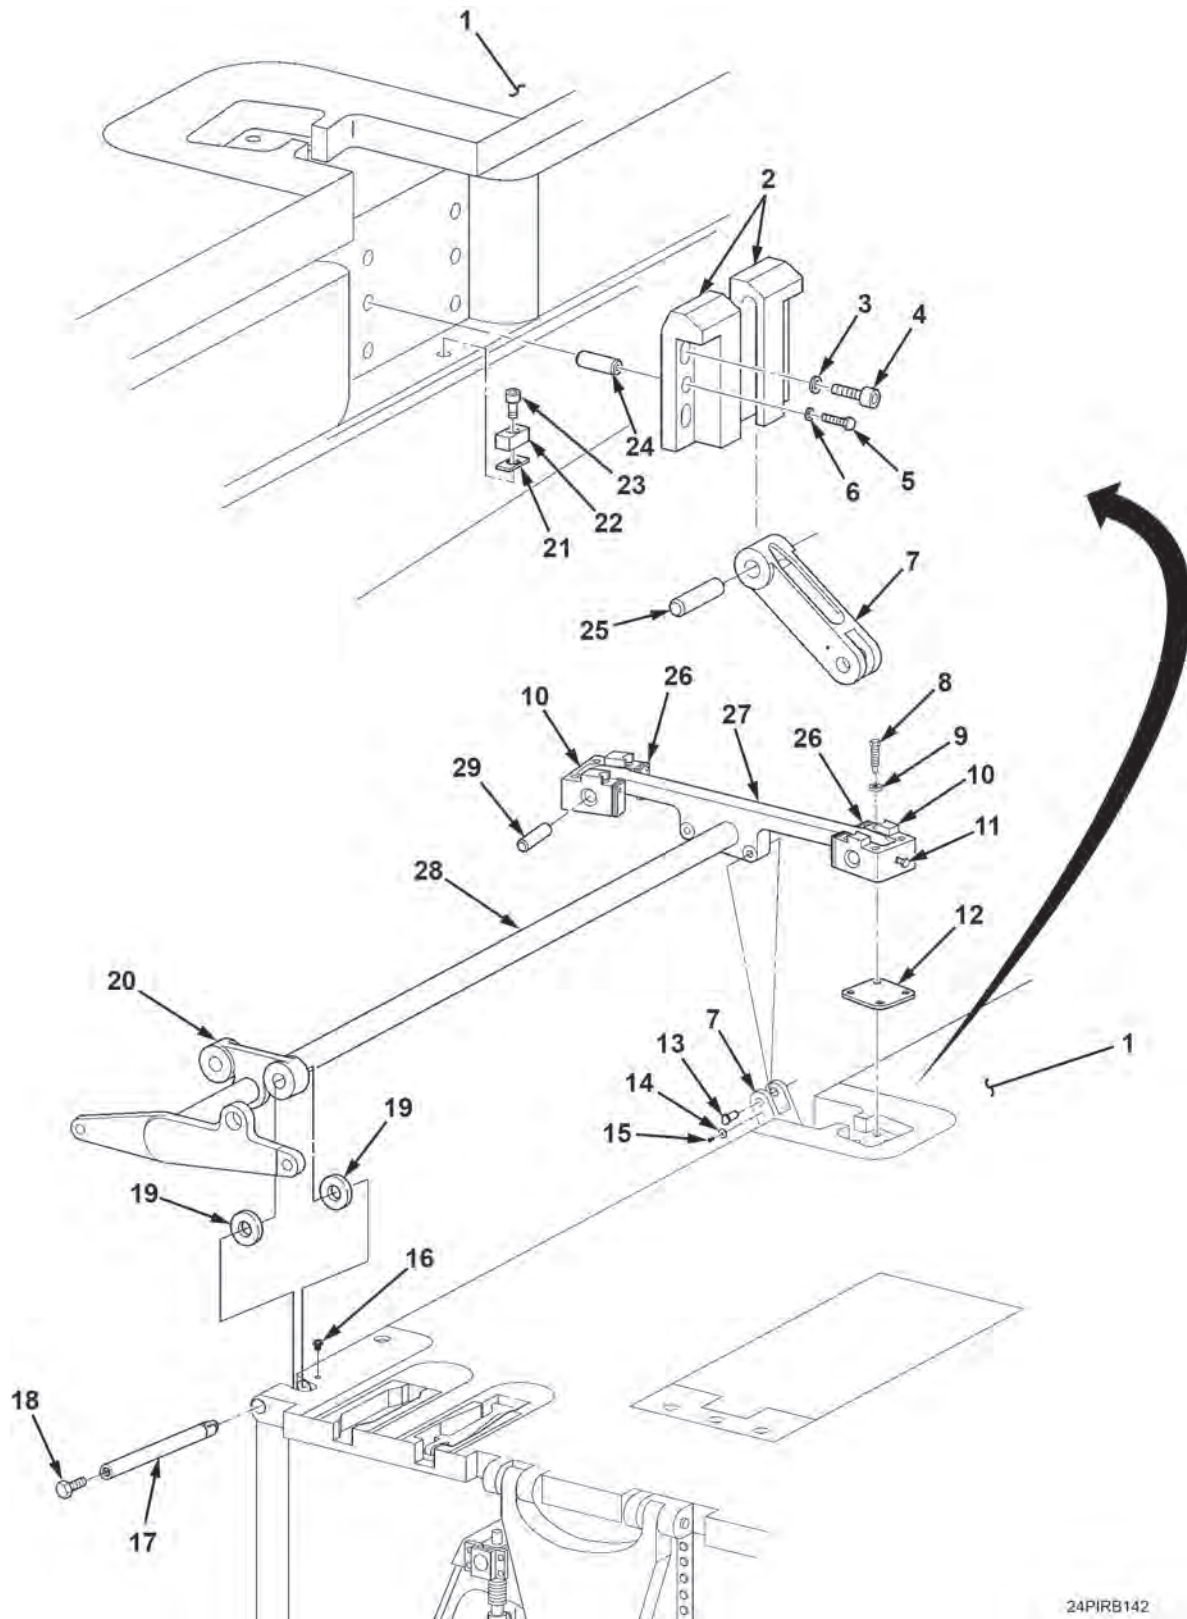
Ramp Bay Unfolding Stabilizer and Brackets Installation.
